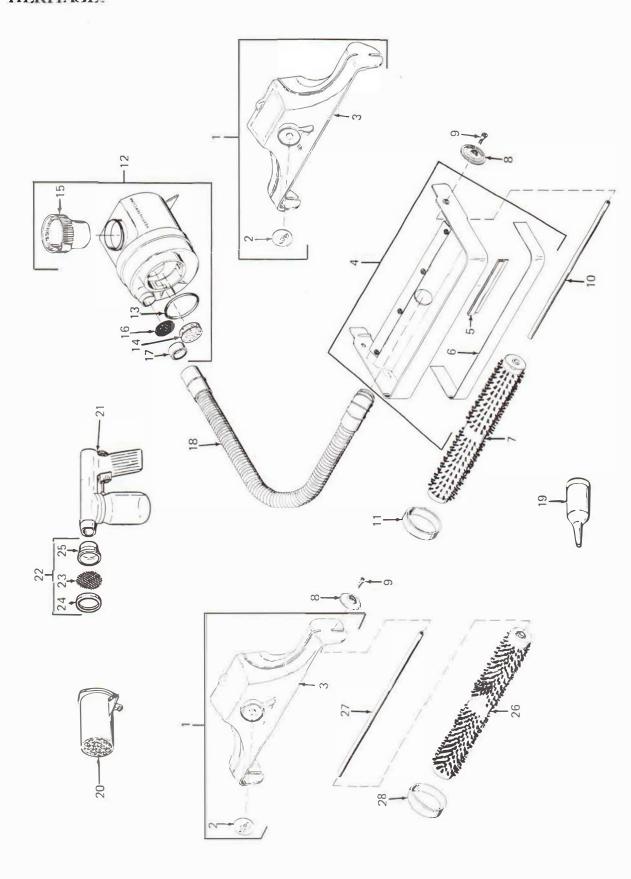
Kirby HERITAGE super renovator group, exploded view
